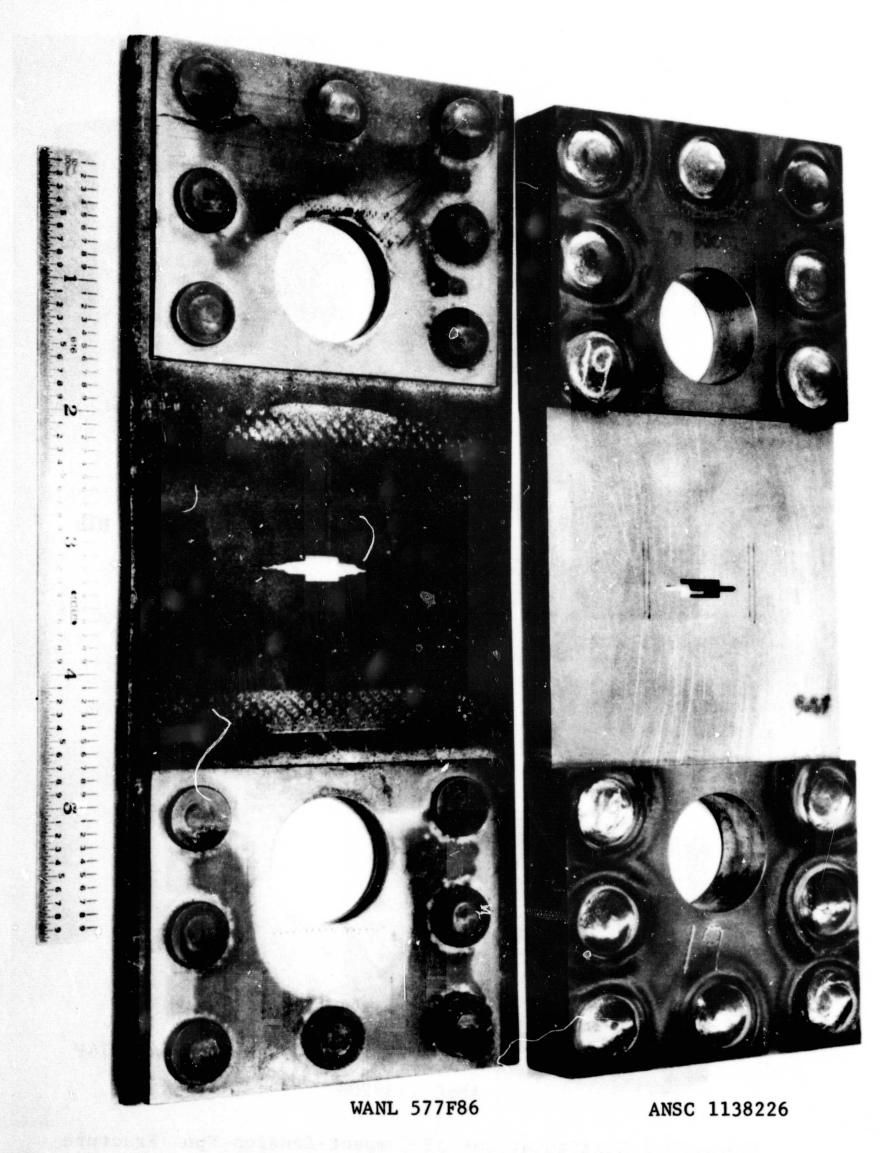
Configurations of Sheet Fracture Toughness Specimens
